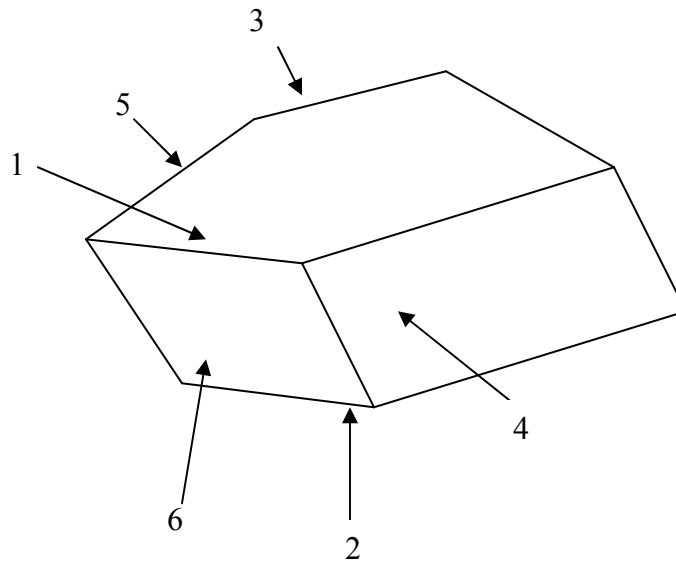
Convection faces used in FEM analysis of Carbide cutting tool
